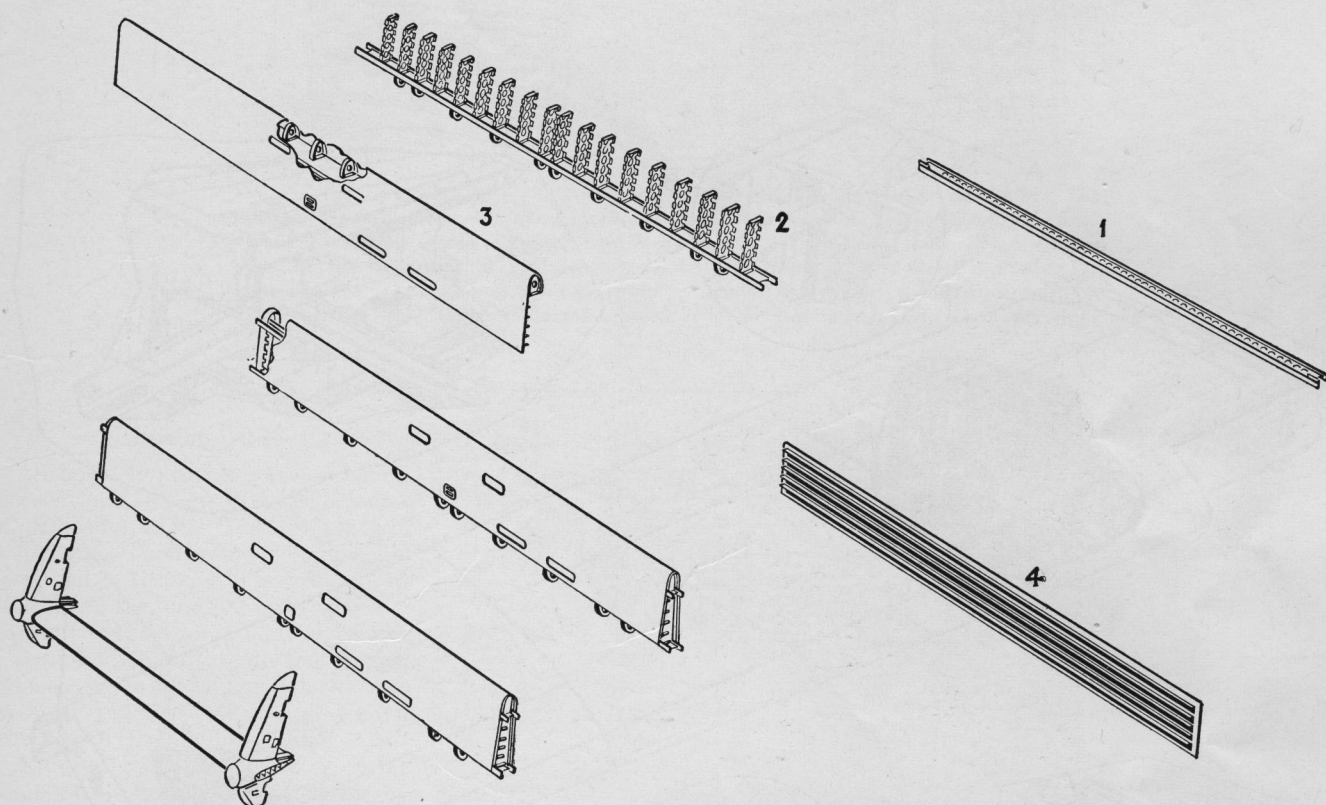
The horizontal stabilizer is comprised of: (1) forward spar; (2) rear spar and ribs; (3) lower skin and nose ribs; (4) upper skin and stringers.
